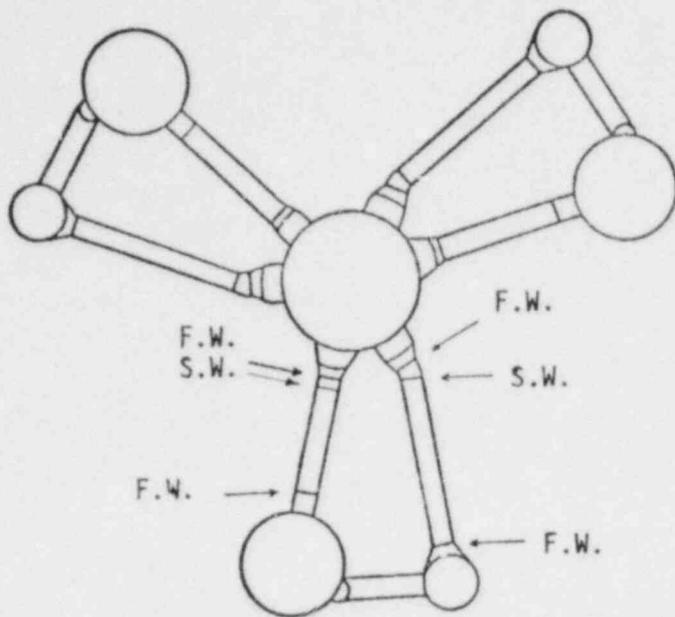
Weld location for Turkey Point Units 3 and 4
